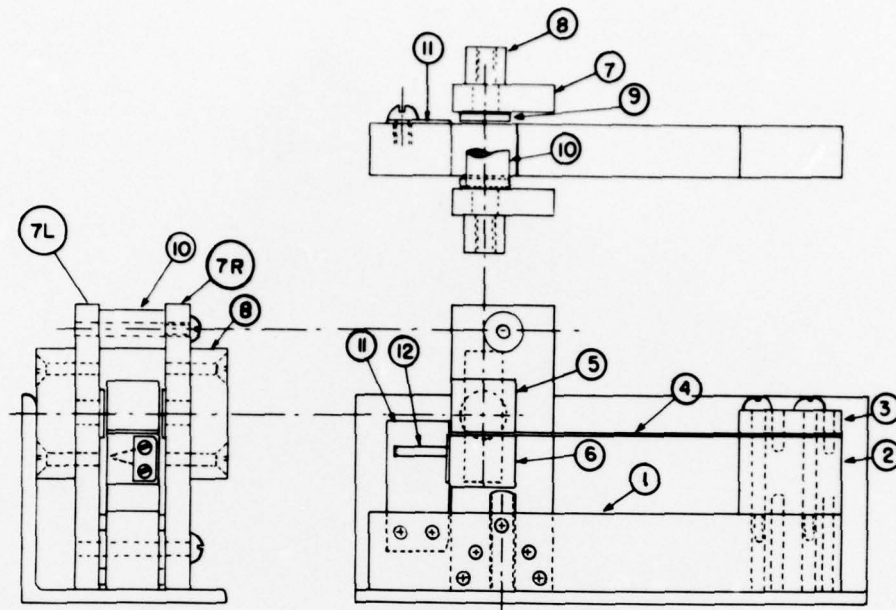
Accelerometer Mechanical Drawing. 1. base; 2 & 3. spring support; 4. 75 ST aluminum spring; 5 & 6. weight; 7R & 7L right and left damper support plates; 8. damper plate adjustments; 9. damper plate; 10. tie bar; 11. recording plate; 12. phosphor bronze scribe.
